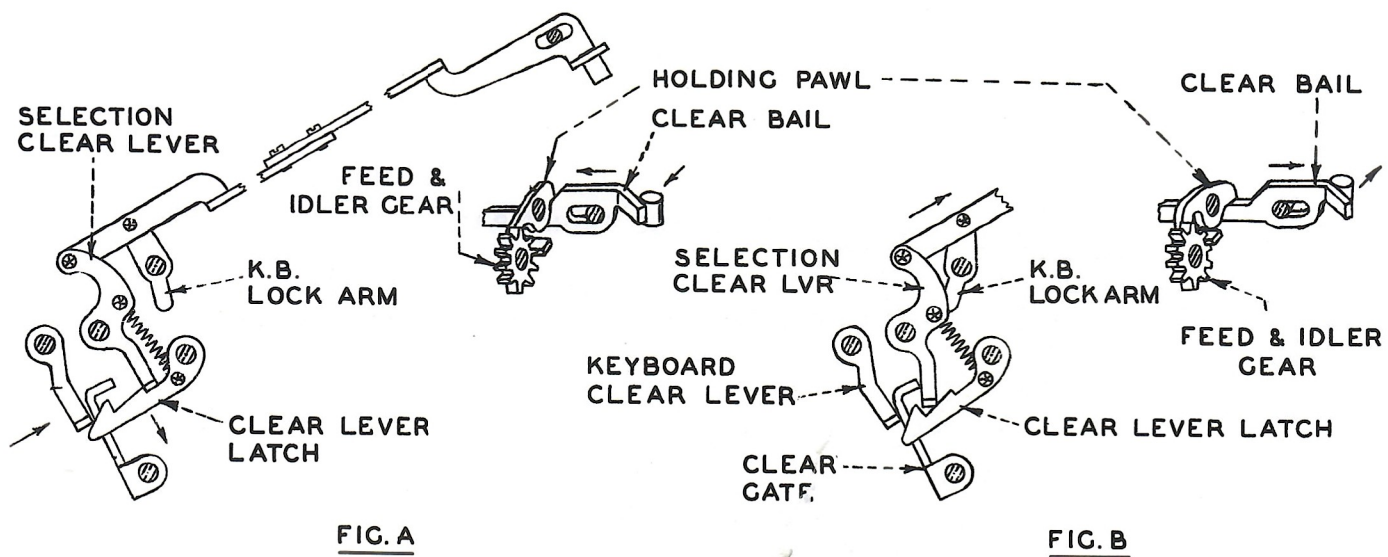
HOLDING PAWL LATCHING AND DELATCHING: FIG. A. Parts are shown in home position. The clear lever latch is holding the selection clear lever; therefore, the clear bail is held to the left so the feed and idler gear holding pawls are held disengaged. The auxiliary slides are free to restore to home position.
